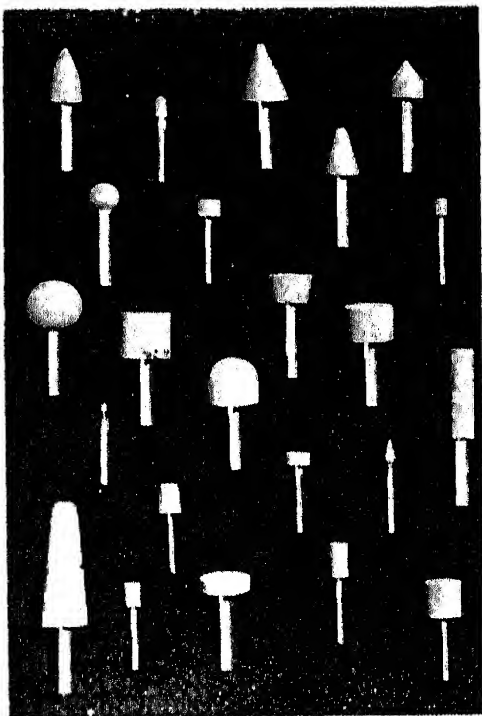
A few examples of mounted wheels and points. (Courtesy Norton Co.)
